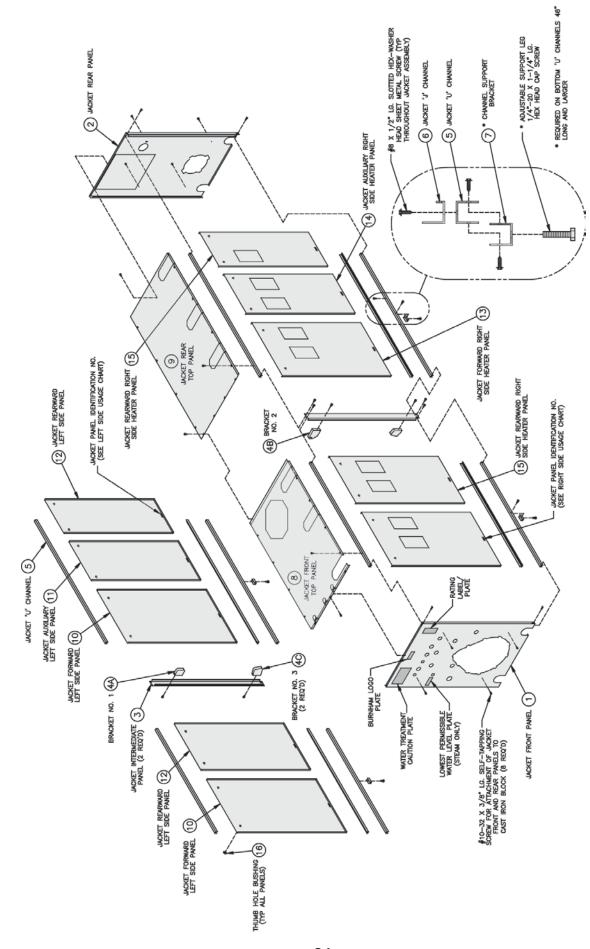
V11 Series Jacket Assembly (Boiler Models V1113 Thru V1123)
